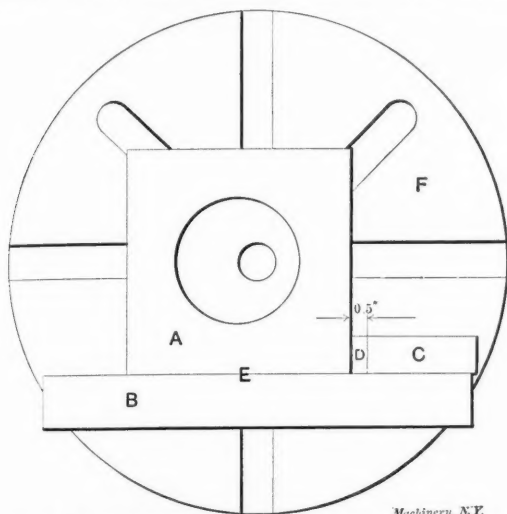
Method of Boring Fixture for Grinding Crankshaft.
